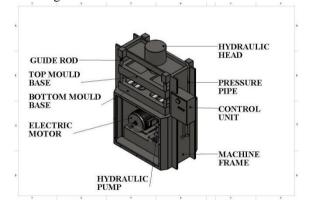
Isometric View of the Dual-Chamber Moulding Machine
